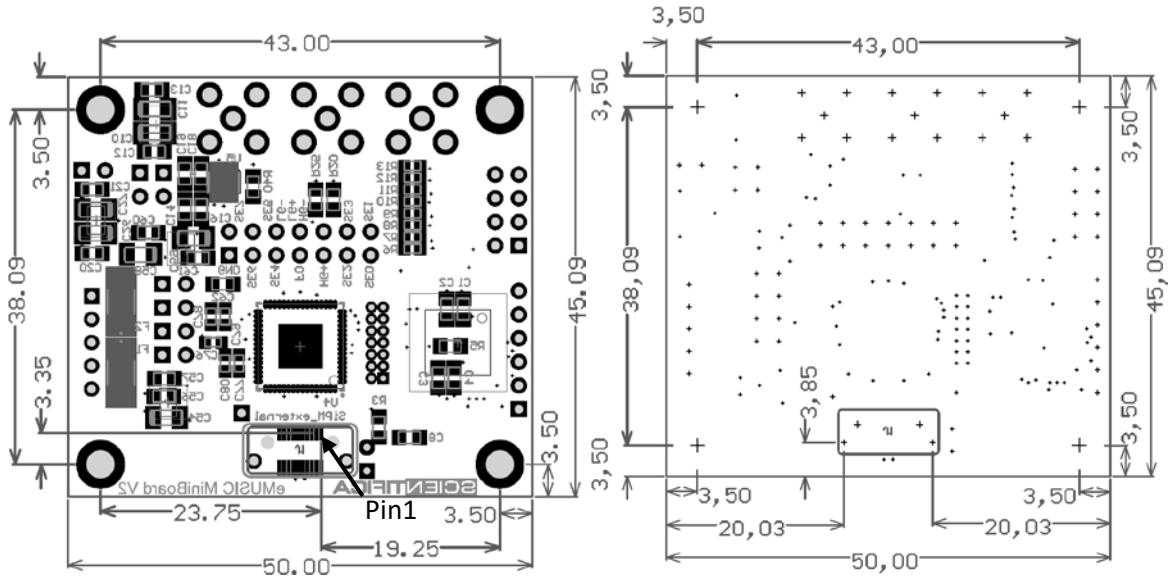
Mechanical dimensions in millimeters over the MiniBoard assembly drawings. It is represented the bottom layer (as seen from the top).
